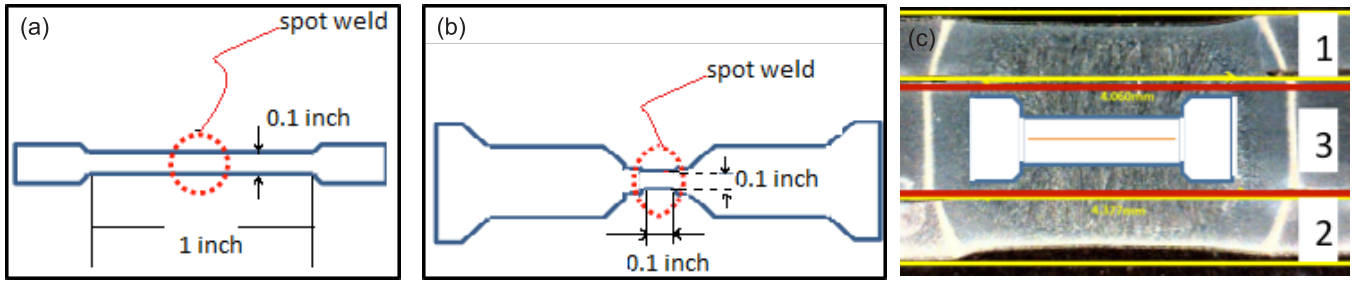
Schematics of (a) the small tensile specimen and (b) the miniature tensile specimen; (c) the miniature specimen in relation to the spot weld.
